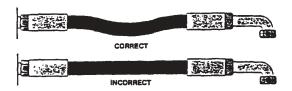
HOSE AND MACHINE TOLERANCES
